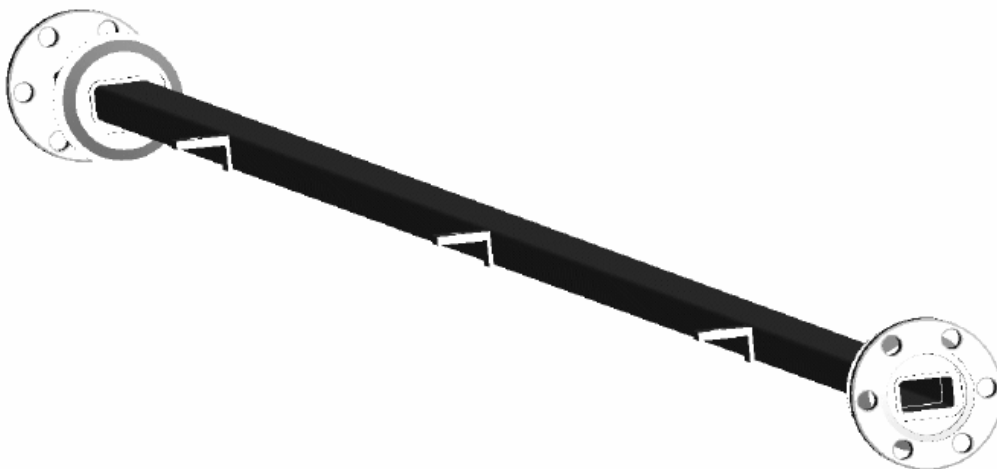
Global view of the undulator vacuum chamber including supports and flanges.
